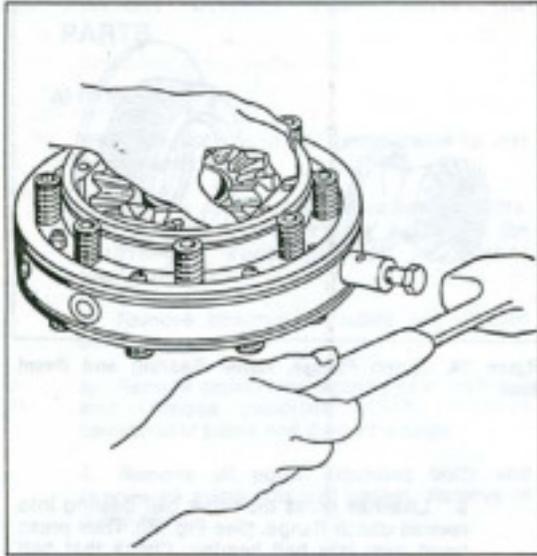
Installation of Bevel Pinion Shaft using Protective Capscrew (1/2-20 NF).
